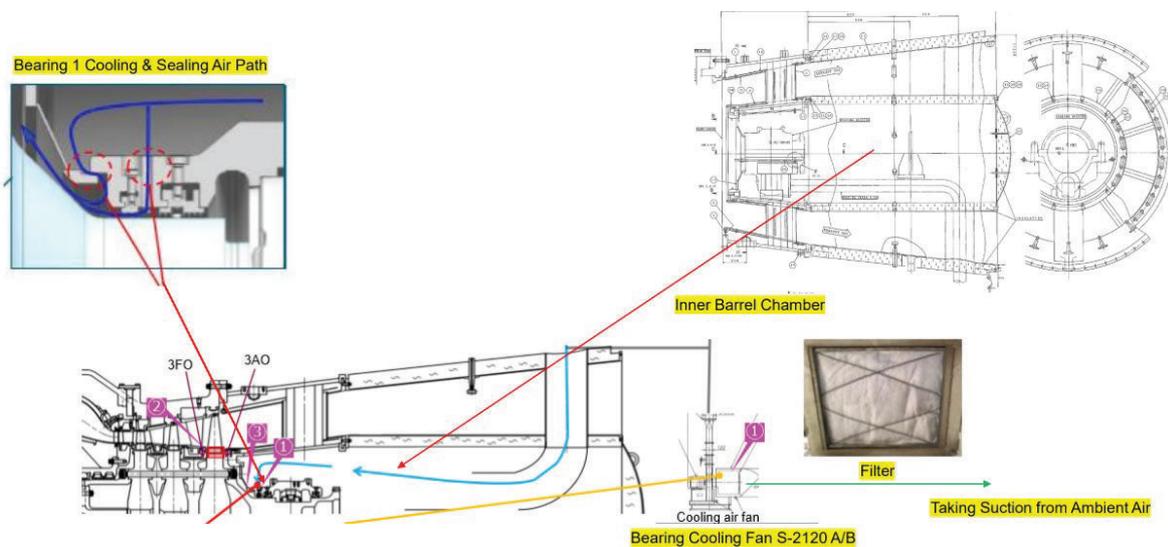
Cooling and Sealing air path of Bearing 1 housing
